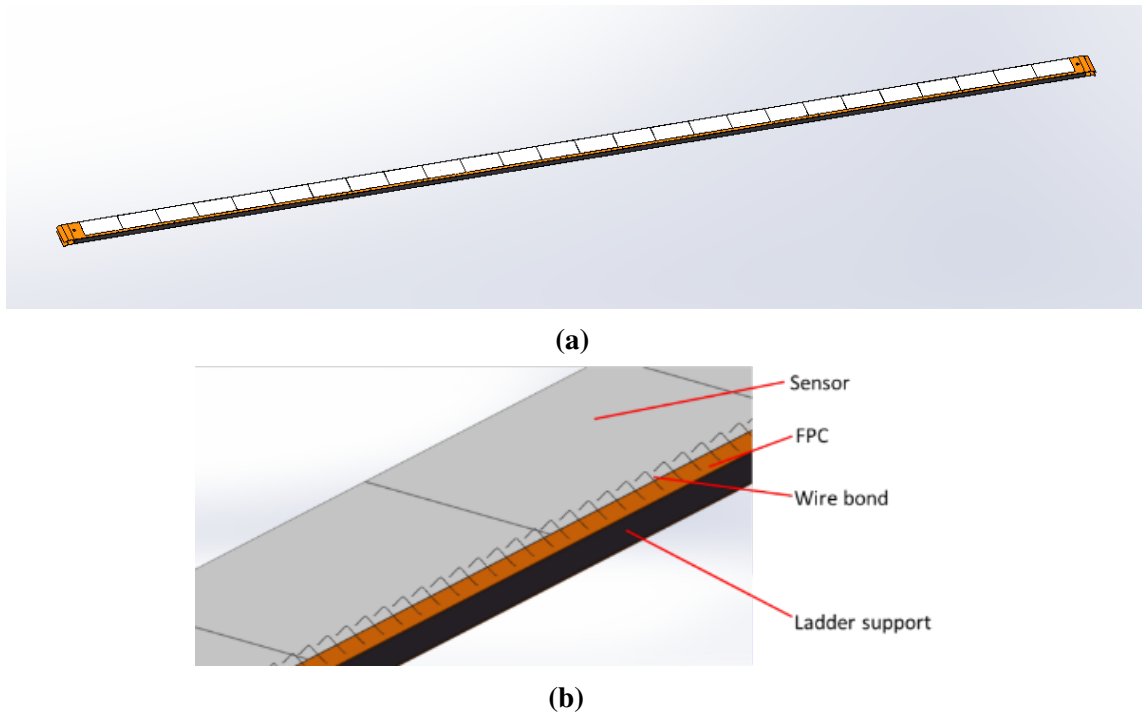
A ladder is composed of 26 chips glued to an FPC mounted on a carbon fiber support: (a) the full ladder assembly; (b) ladder detail showing sensors wire bonded to FPC.
